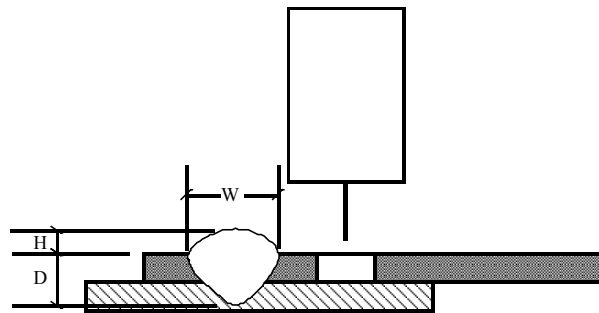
Cross section of gas metal arc spot weld showing a hole in the top sheet and a completed weld bead.
